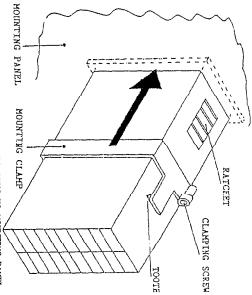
ATTACHMENT OF HOUSING TO MOUNTING PANEL
